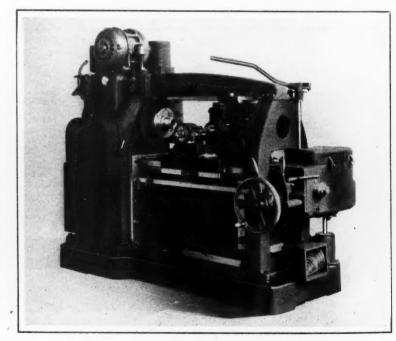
Barber-Colman Hobbing Machine Embodying Improved Features
